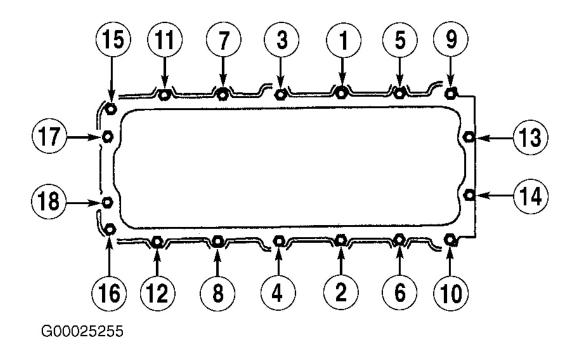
Oil Pan Bolt Tightening Sequence Courtesy of FORD MOTOR CO.
